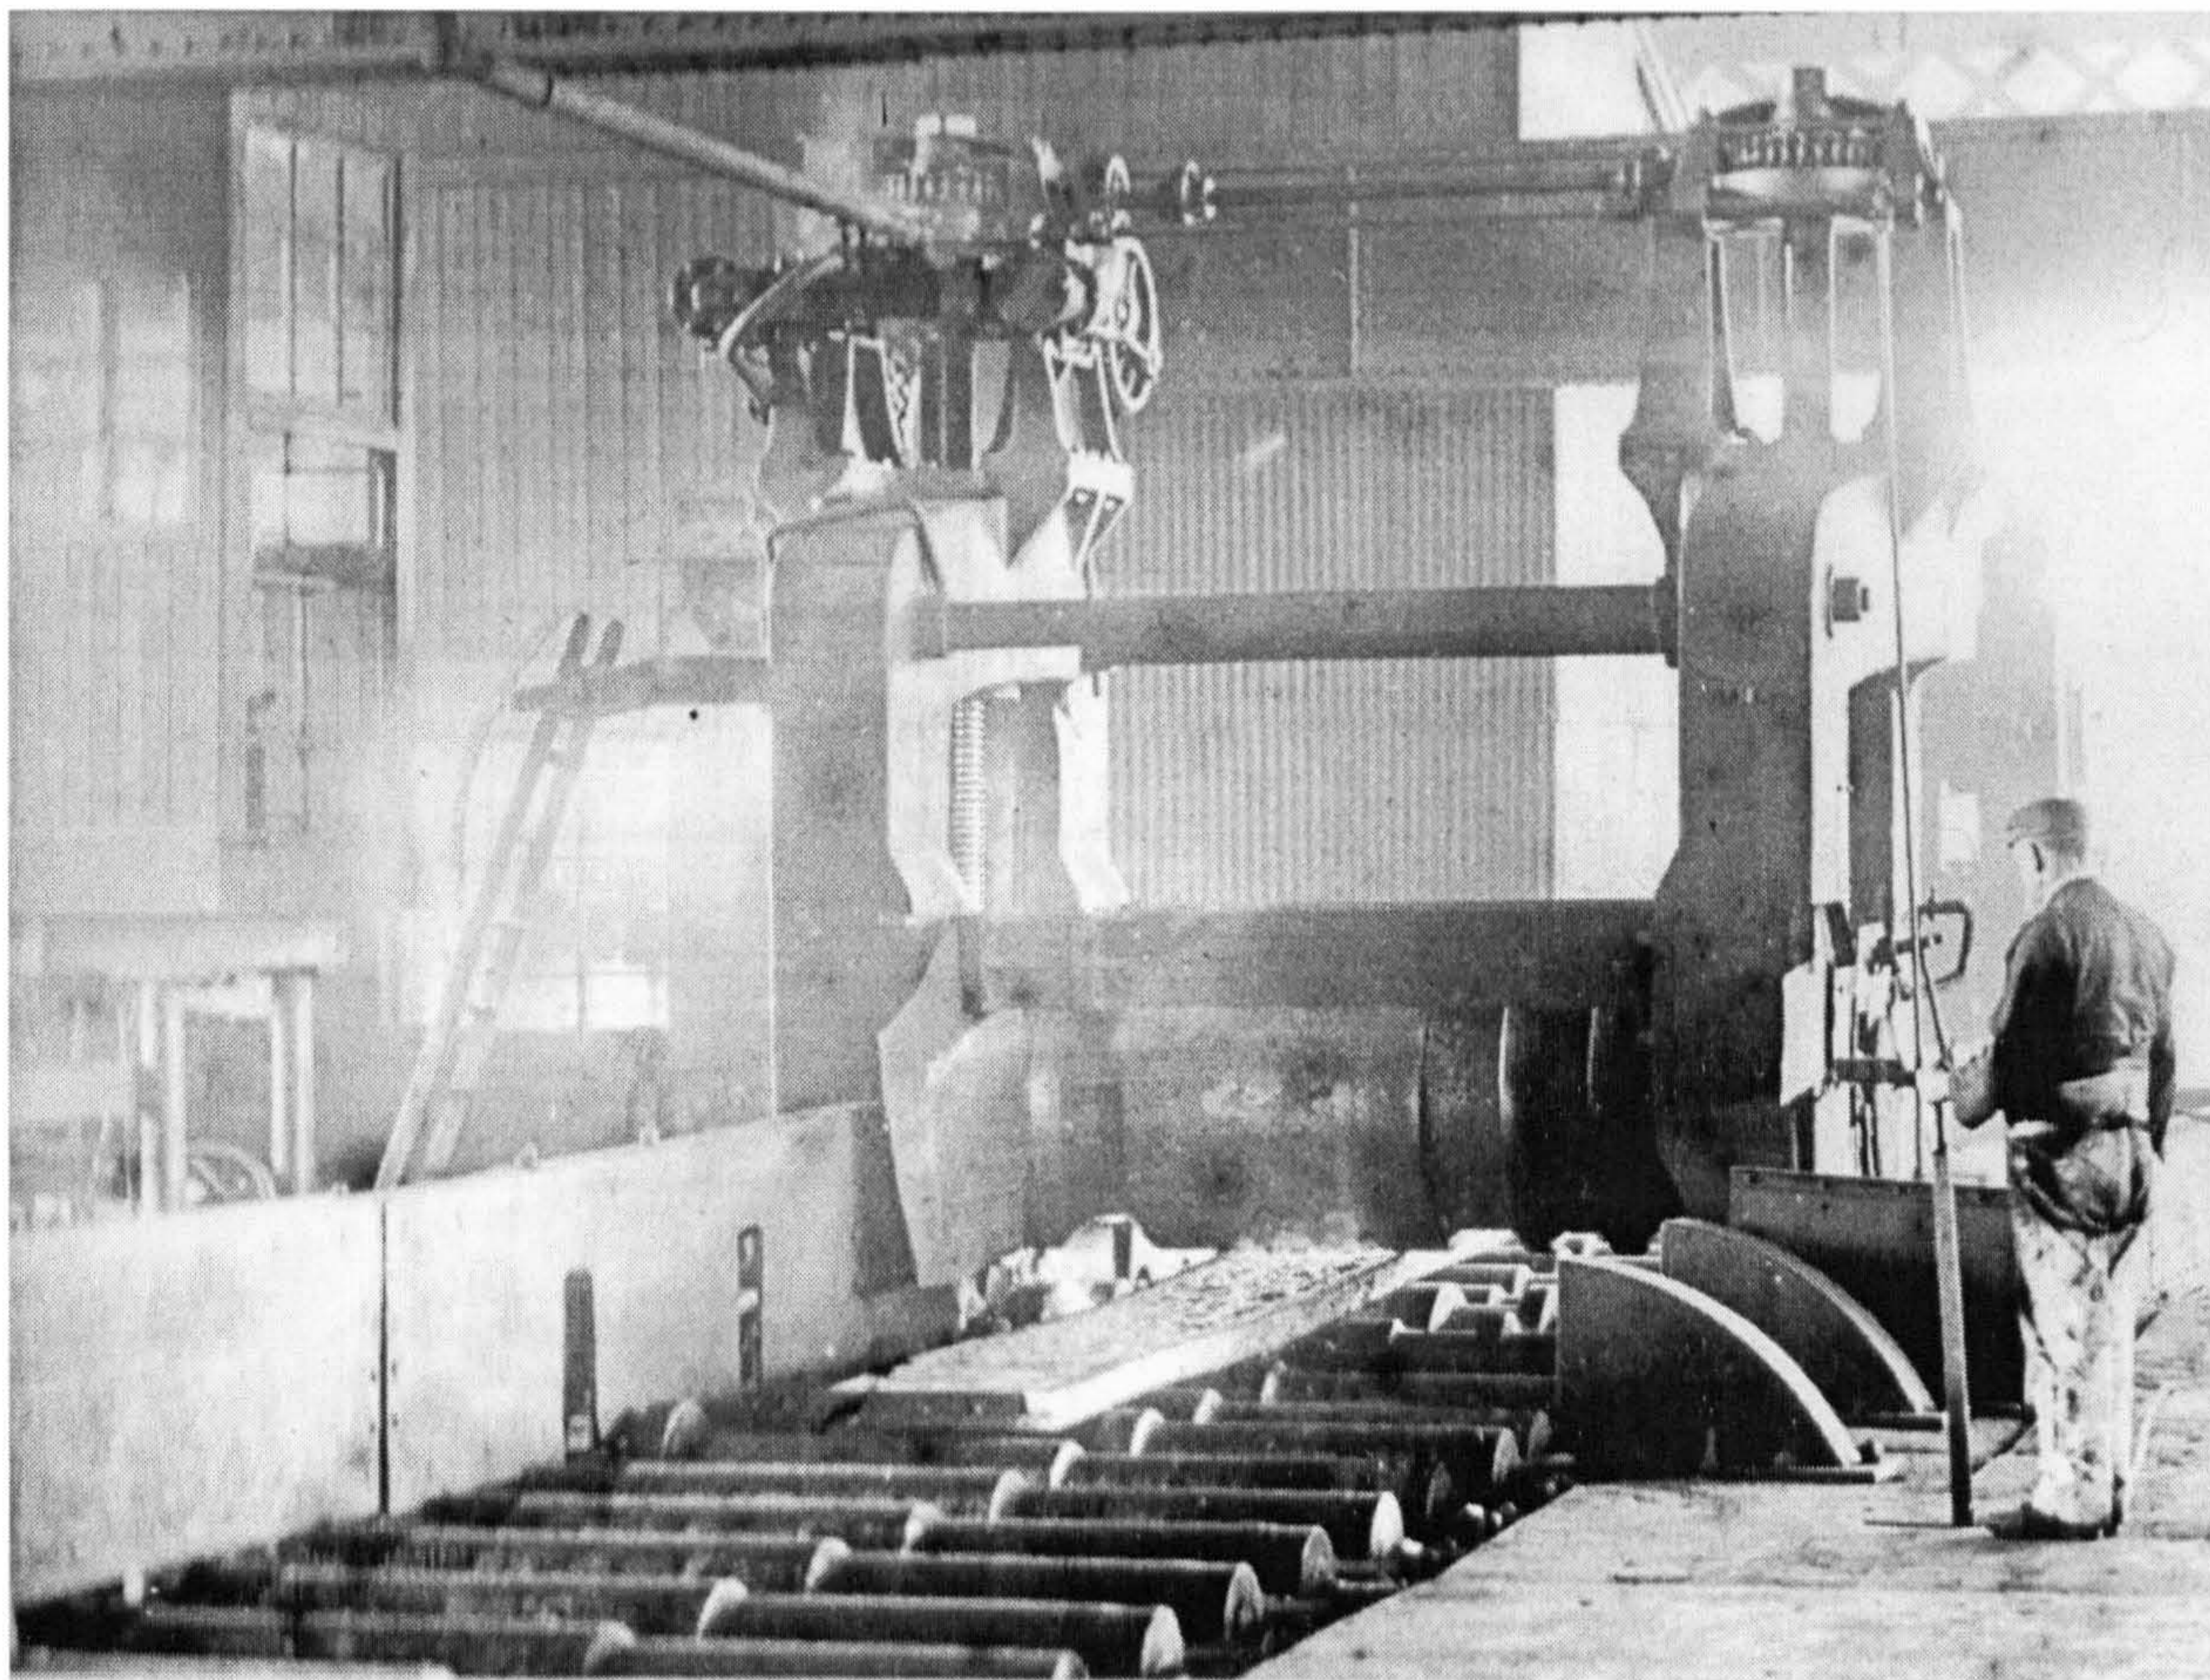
Mechanised cogging mill, Mossend steelworks c1895. A solitary millman carries out the work formerly achieved by hammermen.
